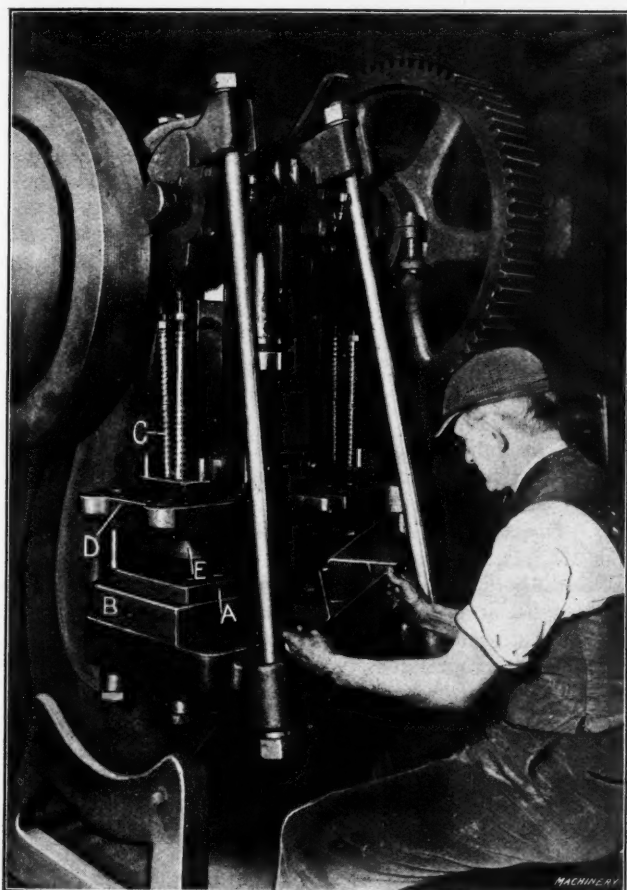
No. 4 Rockford Geared Punch Press used in producing the Sheet-steel Miter-box shown in Fig. 1, set-up for drawing up the Sides of the Frame
